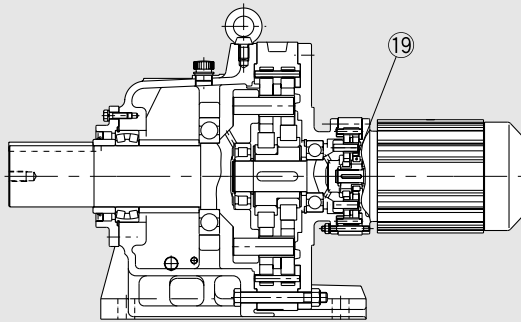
Type CHHM (Horizontal Gearmotor)
